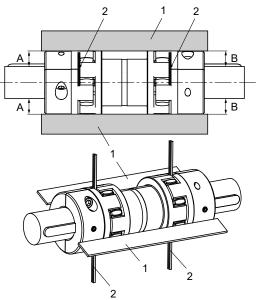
Double Cardan spacer-type coupling, checking the coupling alignment
